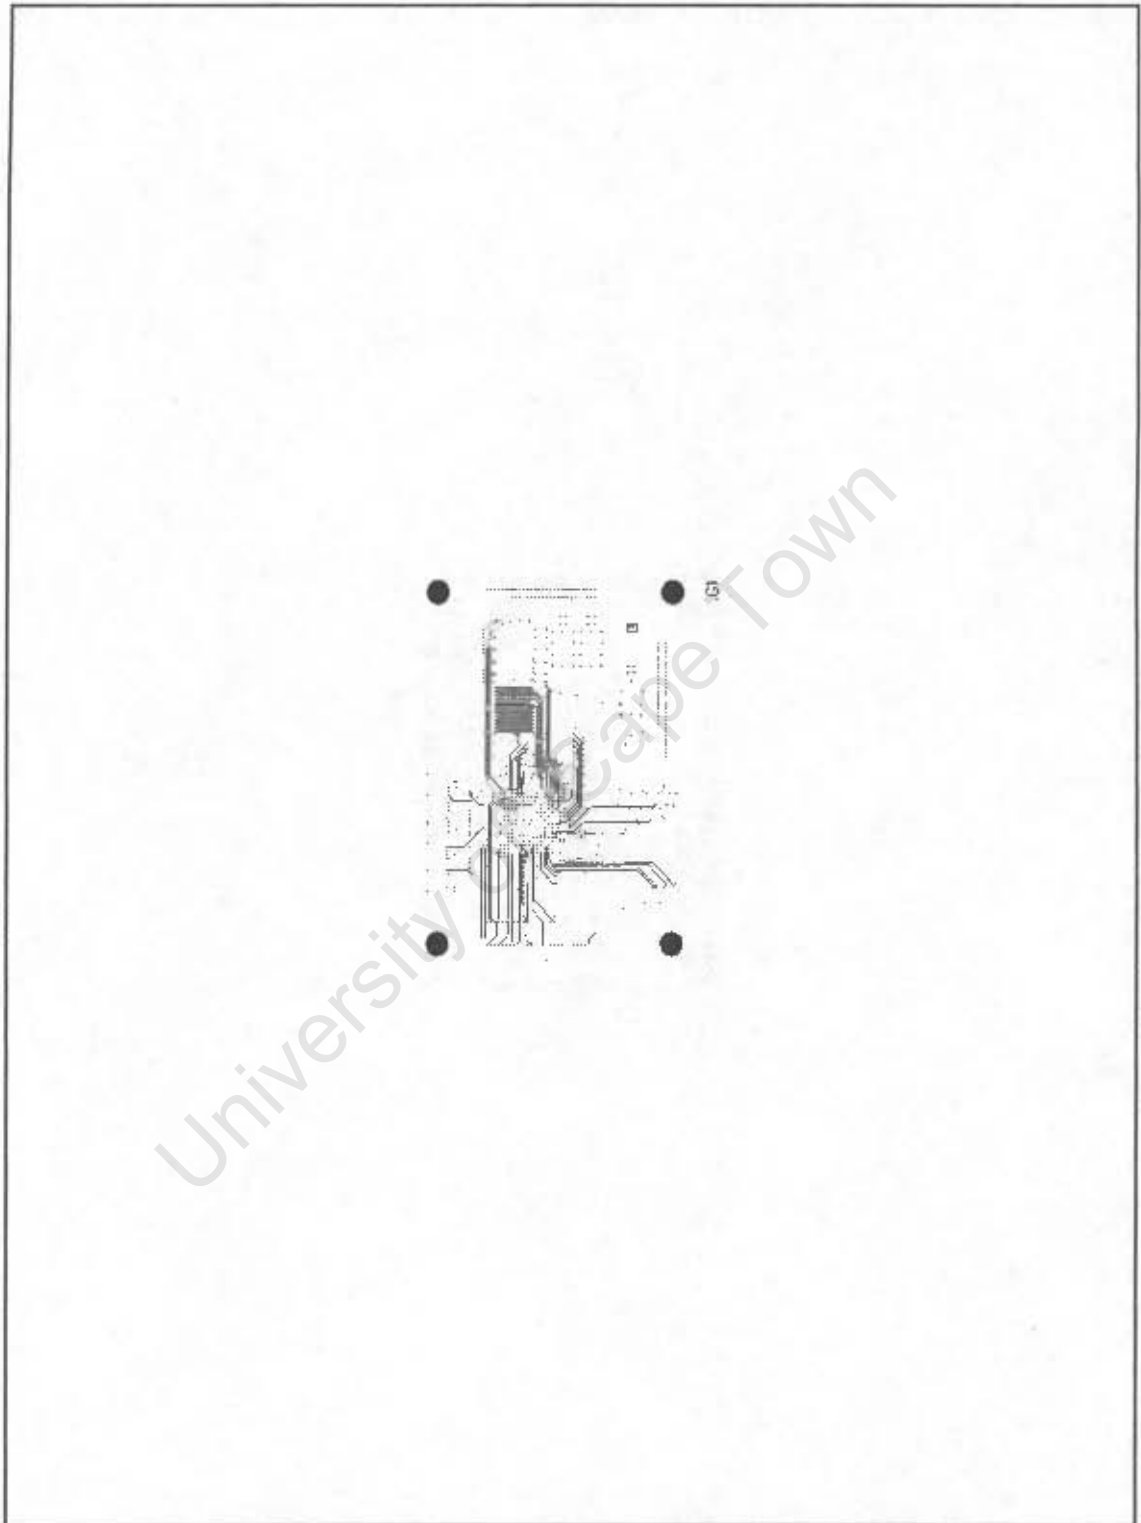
RUJ Module PCB Layout - Internal Signal Layer 1
